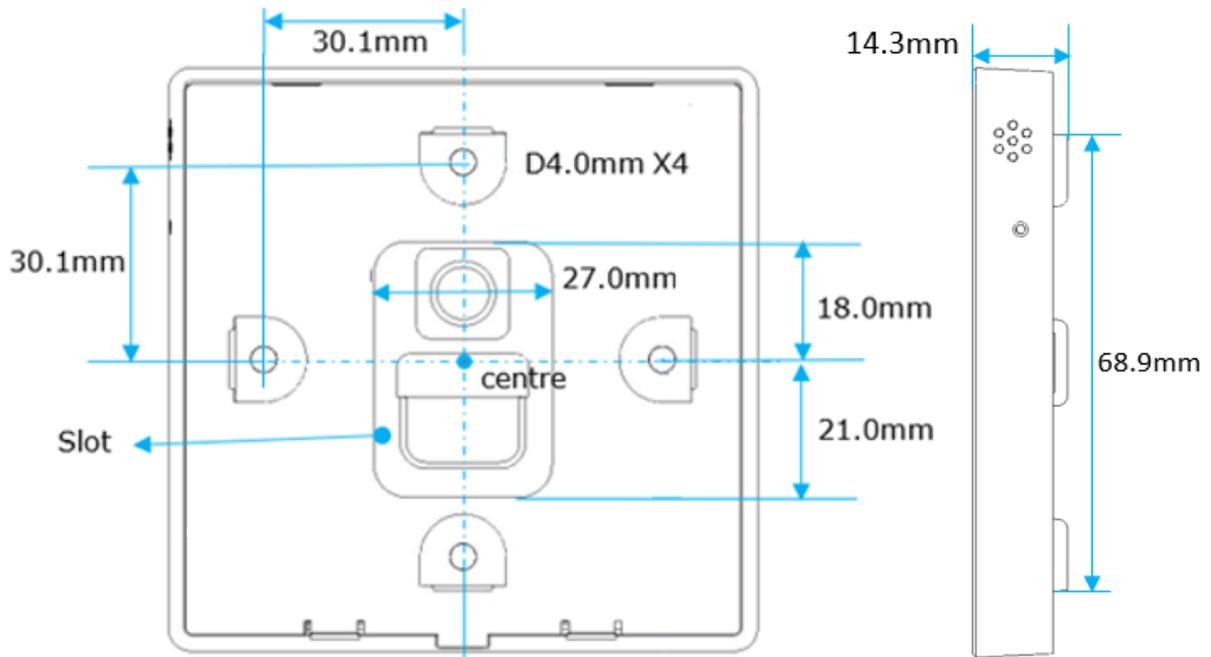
CTP40 Device Wall Box's Mount Bracket Slots and Screw Holes Drawings (Back View / Side View)
